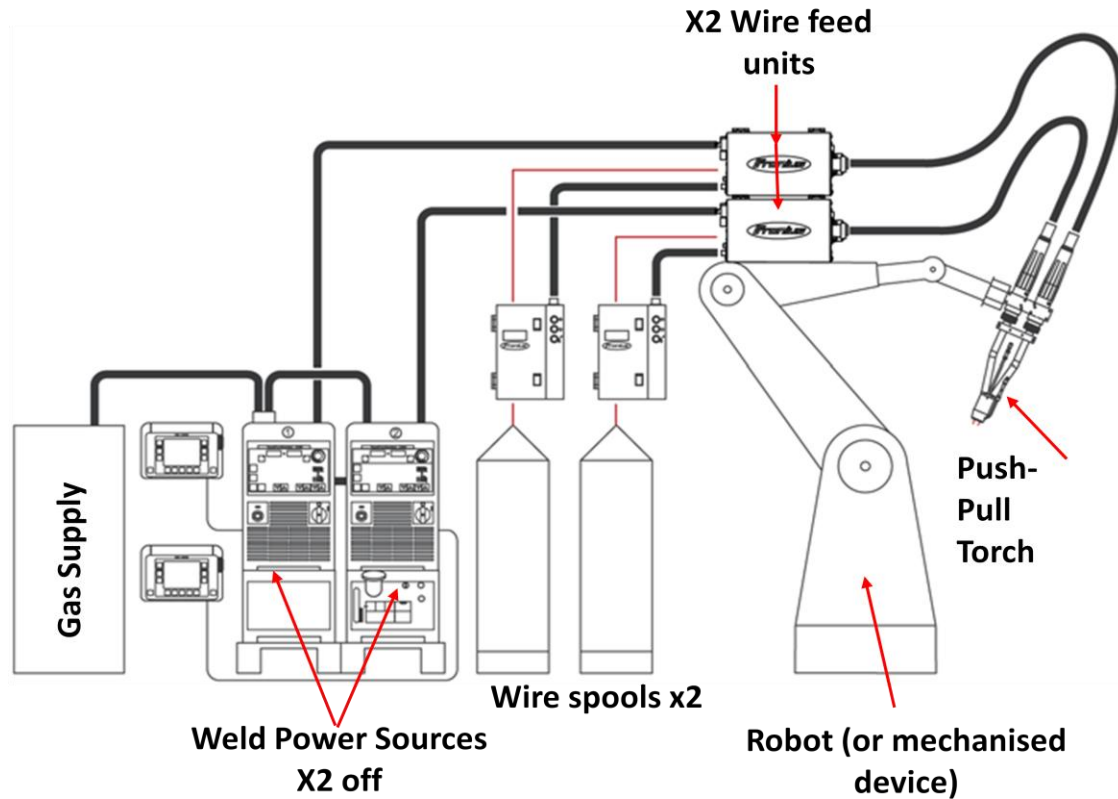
Automated tandem welding (push pull torch) configuration. (Adapted from Fronius manual)
